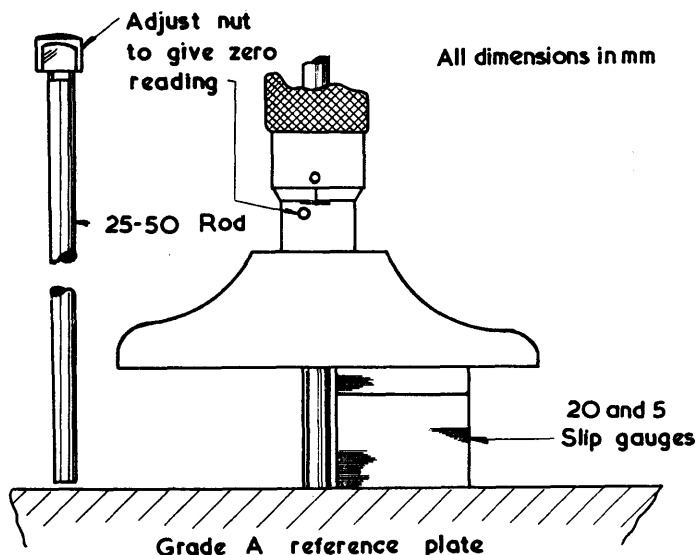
Checking Accuracy of Depth Micrometer for Zero Setting.
